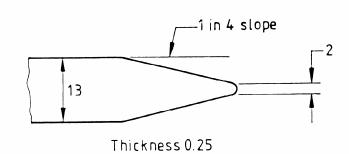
Dimensions of feeler gauge for measuring crack widths
